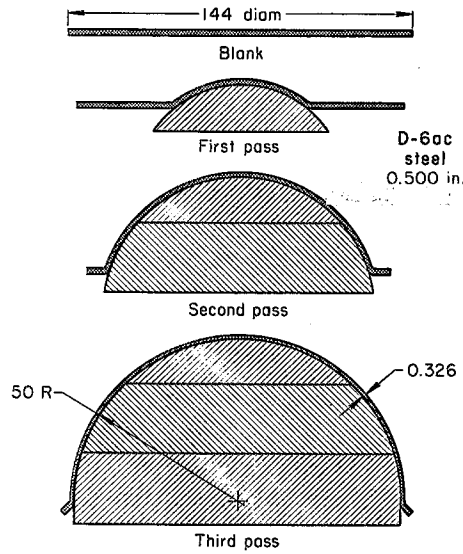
Hemisphere spun from a machined and preformed blank (Example 273)
